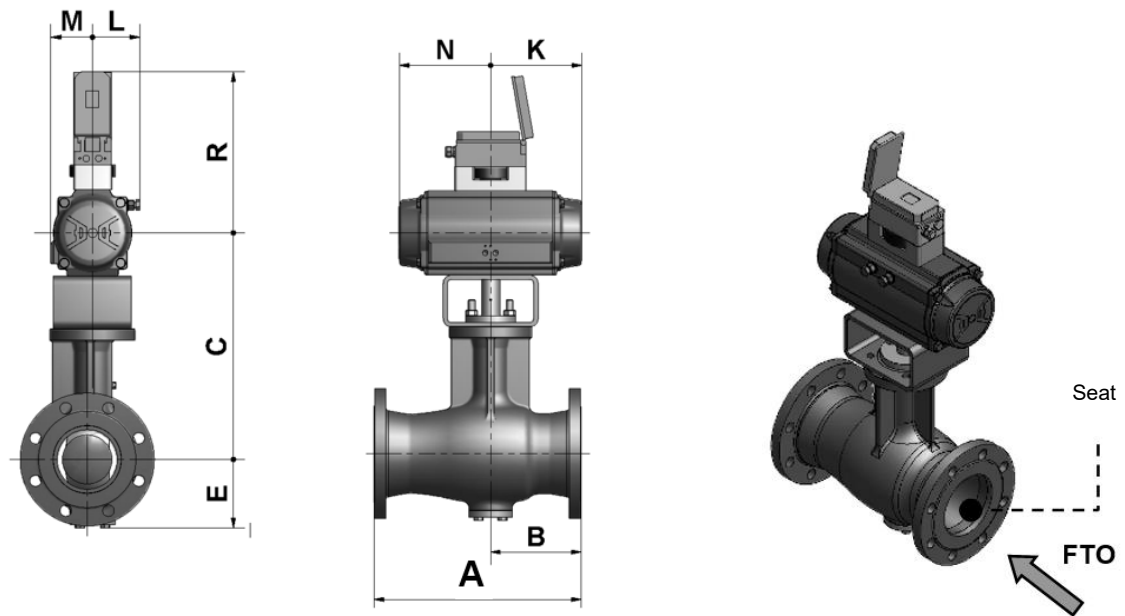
Dimensions - Control valve Type 72.3-02/AT · Assembly position A/C · FO/FC
